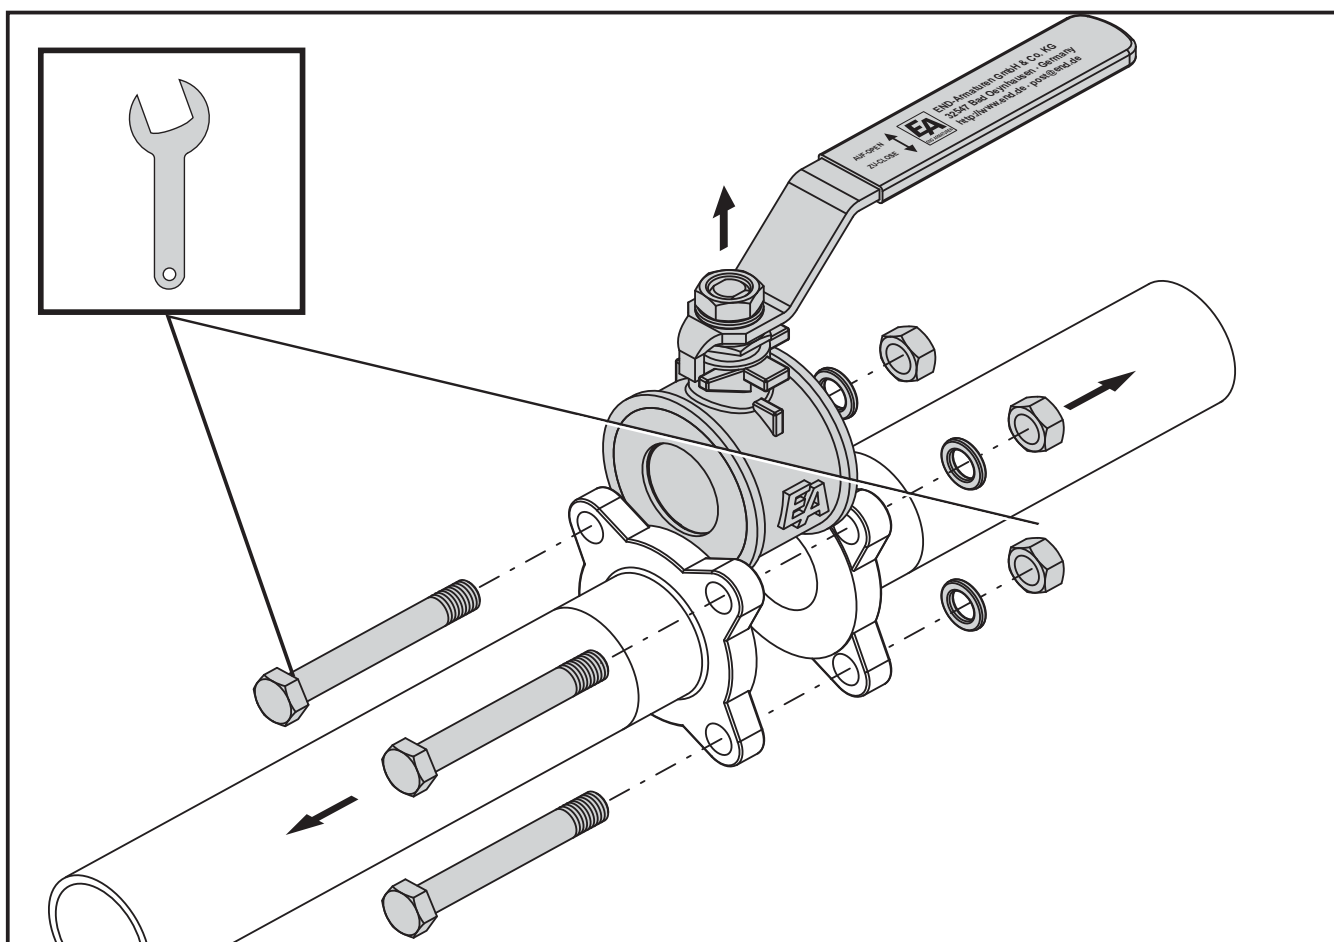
ball valves, replacement of the sealing kit: removal of the center part (Fig.: Art. ZE311064)
